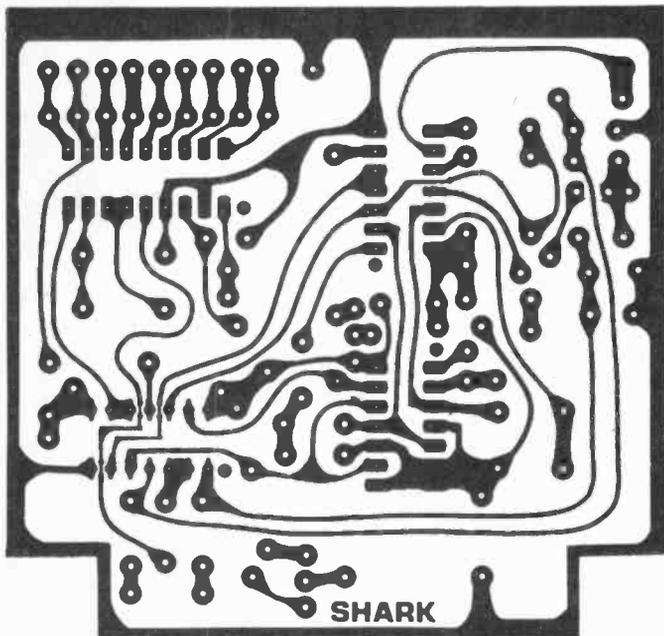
PCB foil pattern for Shark, using a PCB will lessen the amount of interwiring that has to be made.
